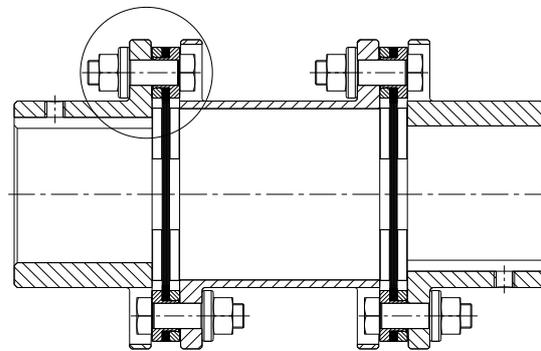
Assembly of lamina sets, RADEX®-N size 80 - 135
